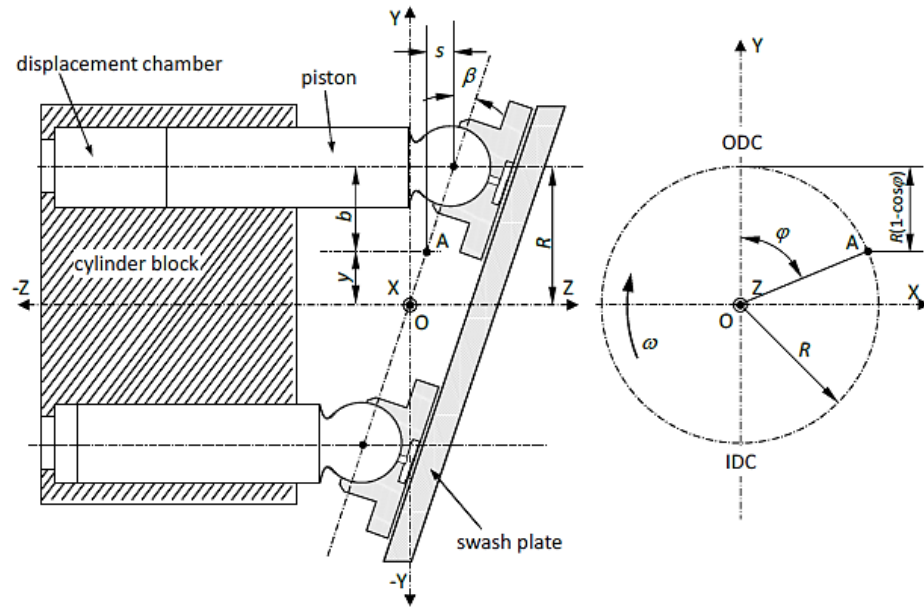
Schematic of an Axial Piston Pump to Explain the Kinematics [15]
